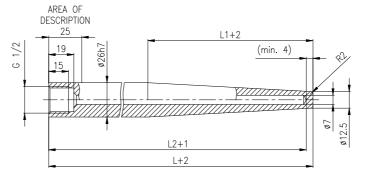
DIMENSIONAL DRAWING, TABLE OF DESIGNS AND WEIGHTS OF THERMOWELLS, SHAPE 4 PURSUANT TO DIN 43772, THREAD $\frac{1}{2}$ - 14 NPT
